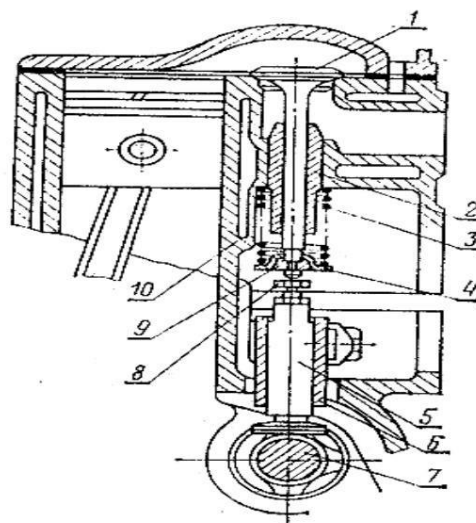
Gas distribution mechanism with side-mounted valves. 1-valve; 2-valve guide bushing; 3-spring; 4-washer; 5-tappet; 6-tappet bushing; 7-distribution shaft; 8-adjusting bolt; 9-cracker; 10-block-crankcase.
